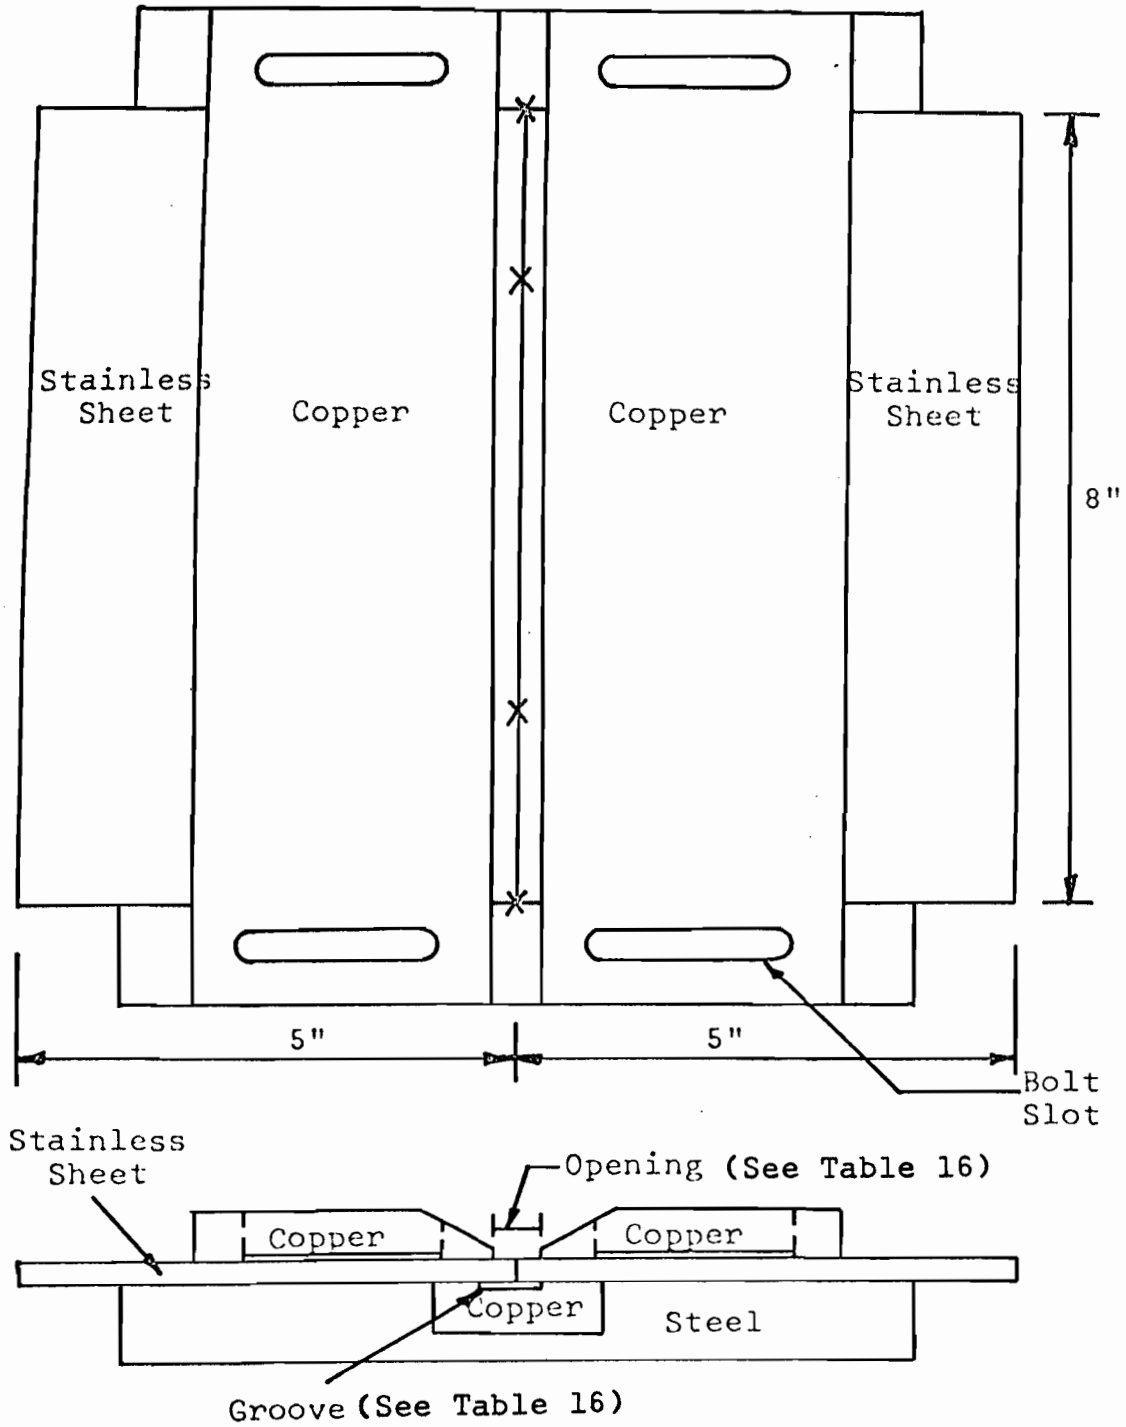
Welding Fixture, Butt Weld Specimens
